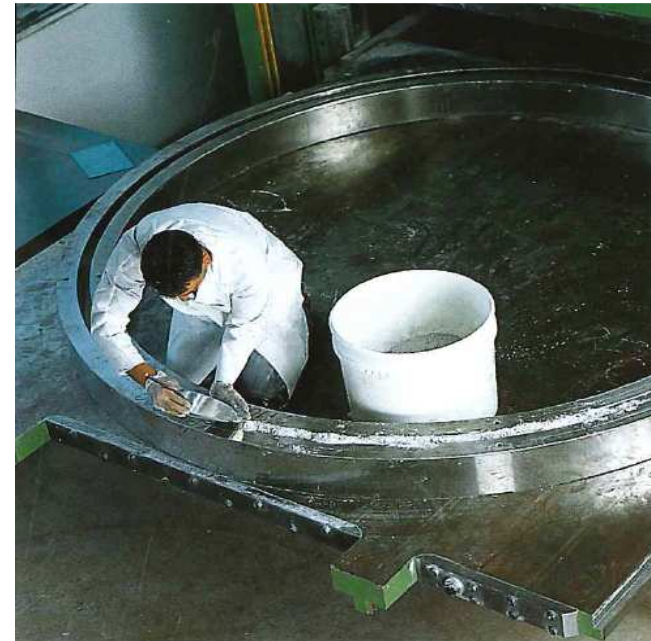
a tool to manufacture a ring-formed test piece is filled with PTFE powder
